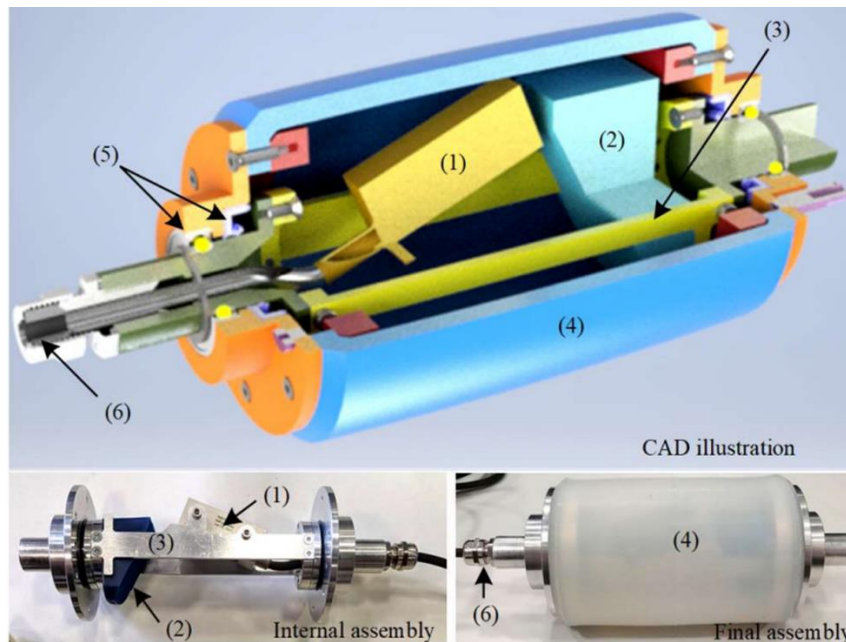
computer-aided design and physical assembly of the PAUT roller probe: (1) A 5MHz-64 element PAUT transducer, (2) absorber (3) holding structure, (4) high temperature tire, (5) bearing and shaft seal and (6) cable gland [139]
